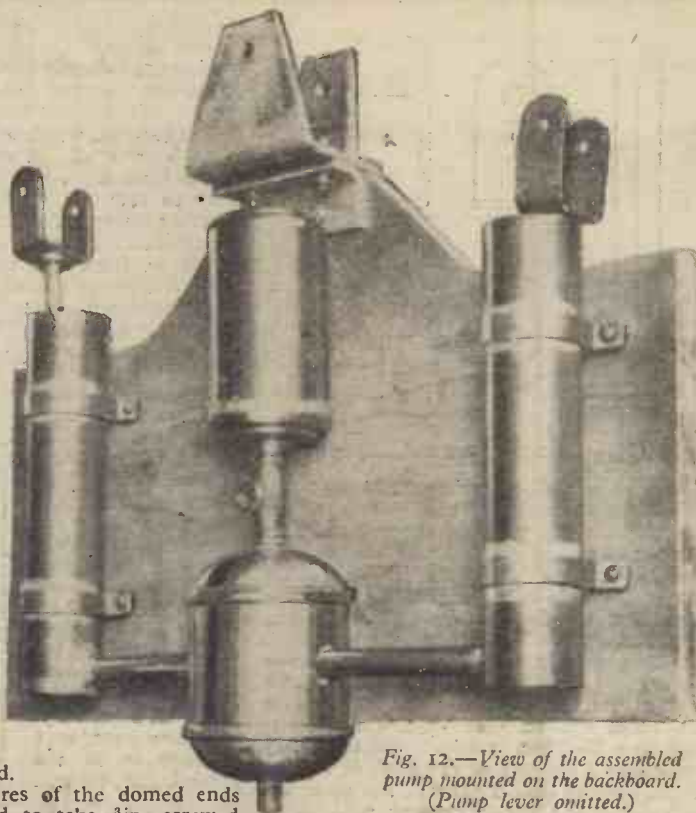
View of the assembled pump mounted on the backboard. (Pump lever omitted.)
